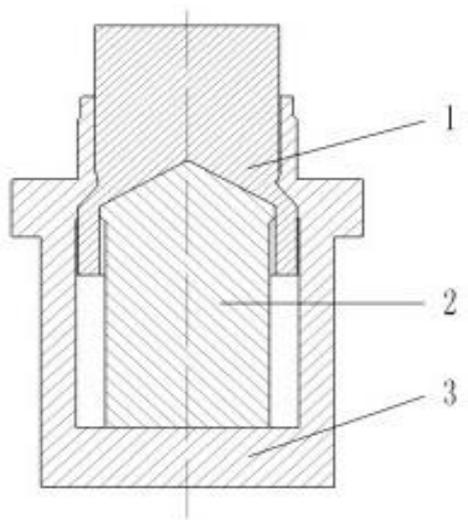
tube-expanding forming die. 1-billet; 2- core die;3-outer die
